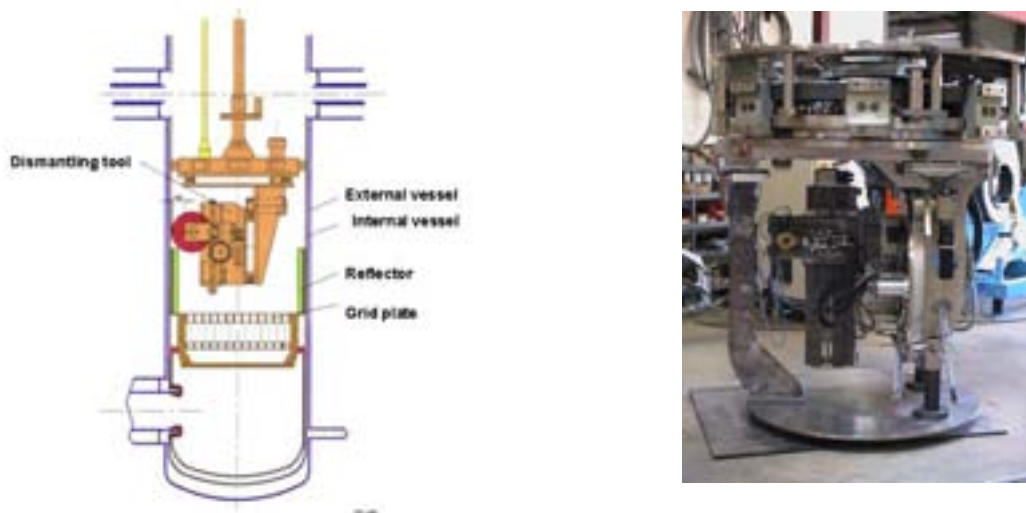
Dismantling machine (as scheme inside the vessel and as picture)
